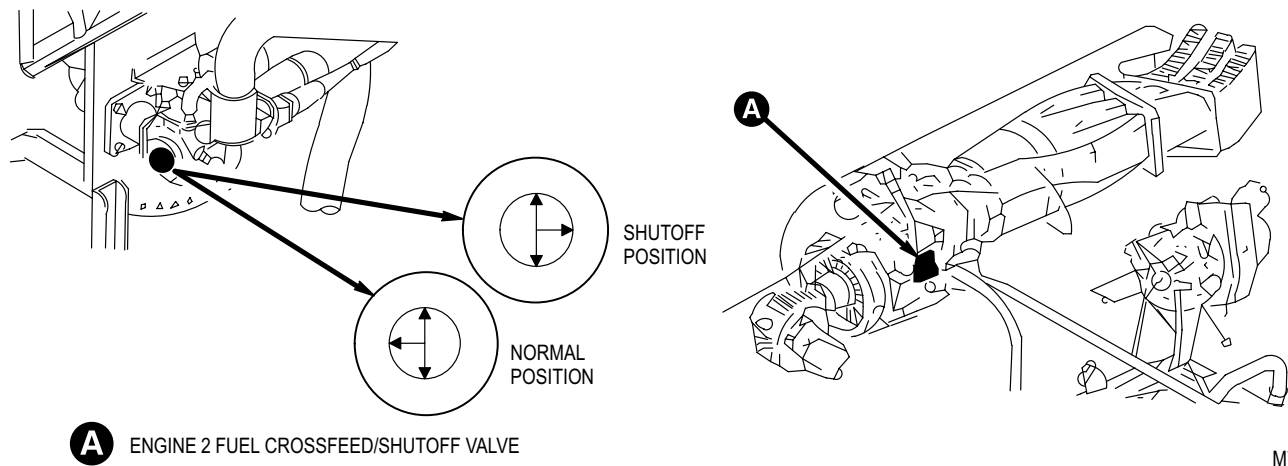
Engine 2 Fuel Crossfeed/Shutoff Valve
